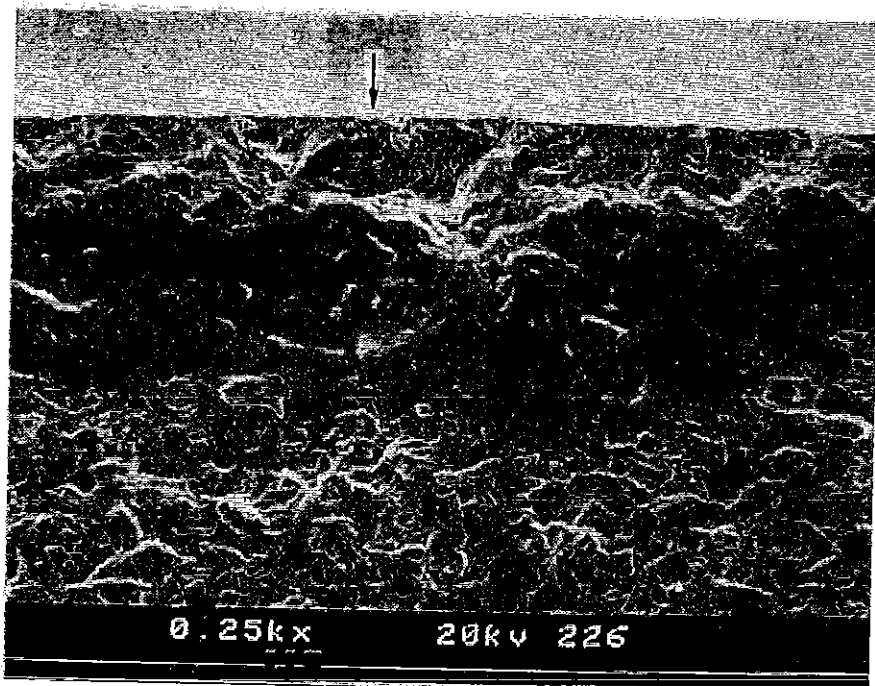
Fracture region shown at top edge of fractograph (spec 3x2 in (7.6x5.0 cm)).
